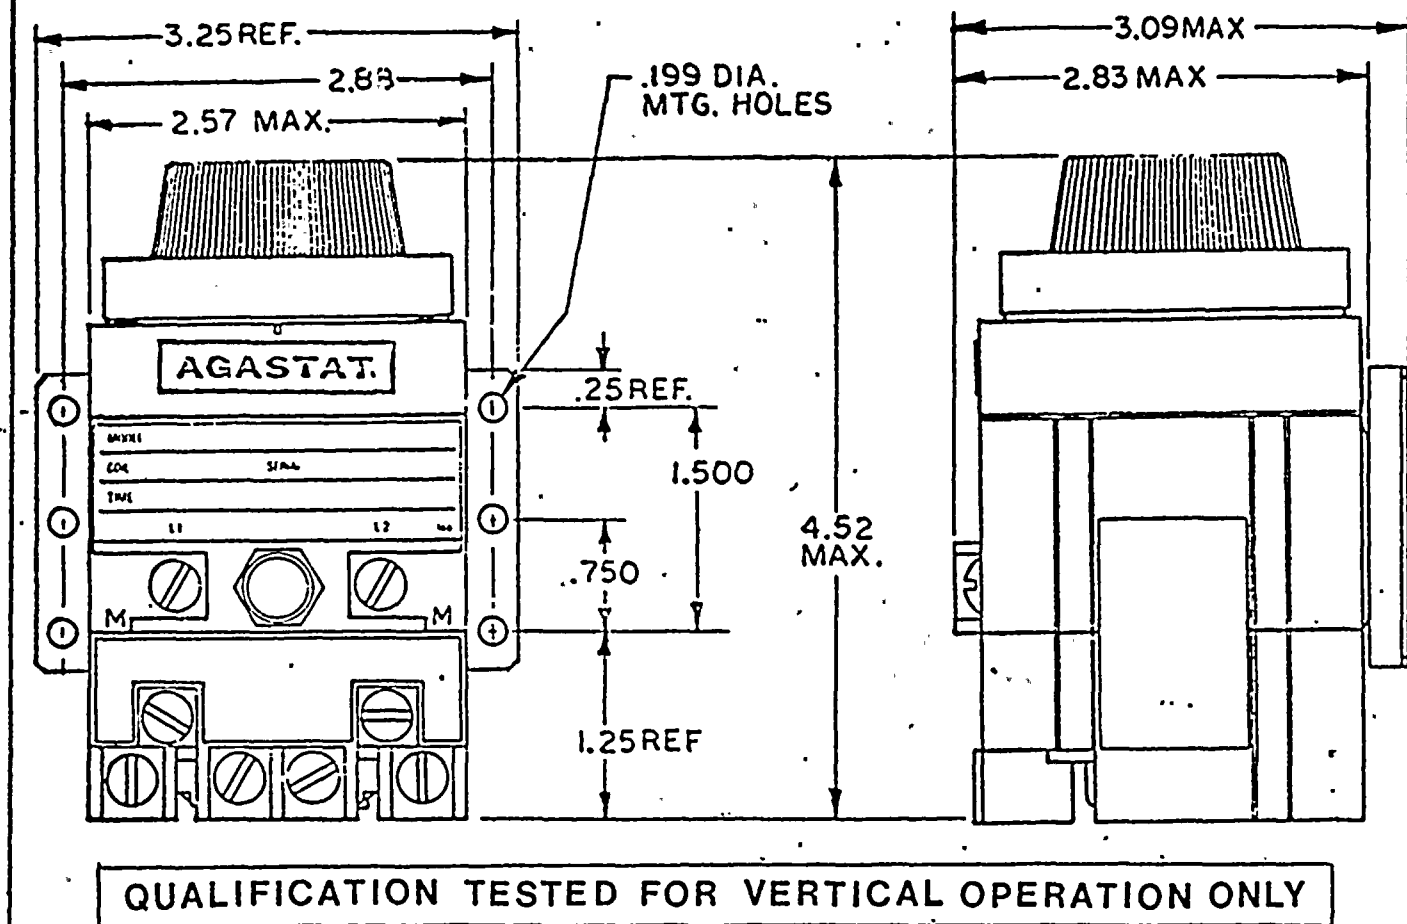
Model E7012 and E7022 Outline and Dimension Drawing.
